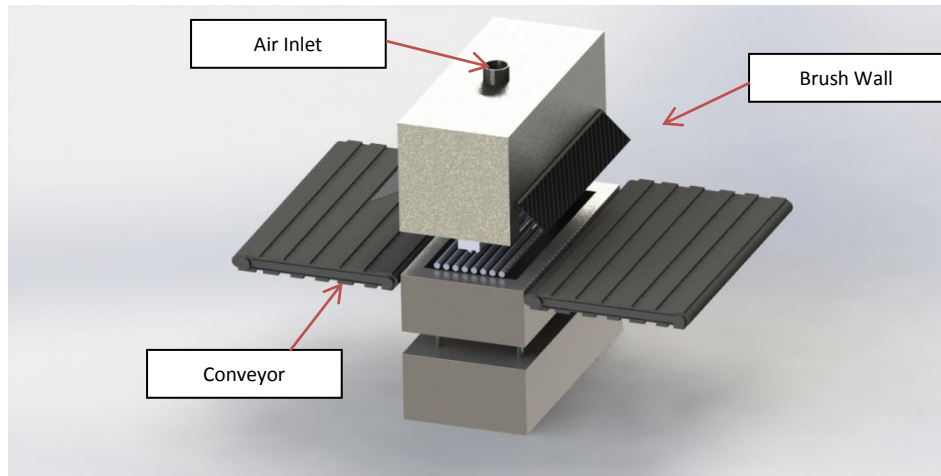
EXAIR foam-sealed air knife model of air knife with foam seal.
